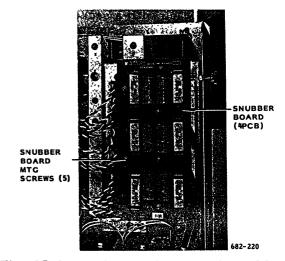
Main Circuit Thyristor Assembly (460 V, 105 A)
